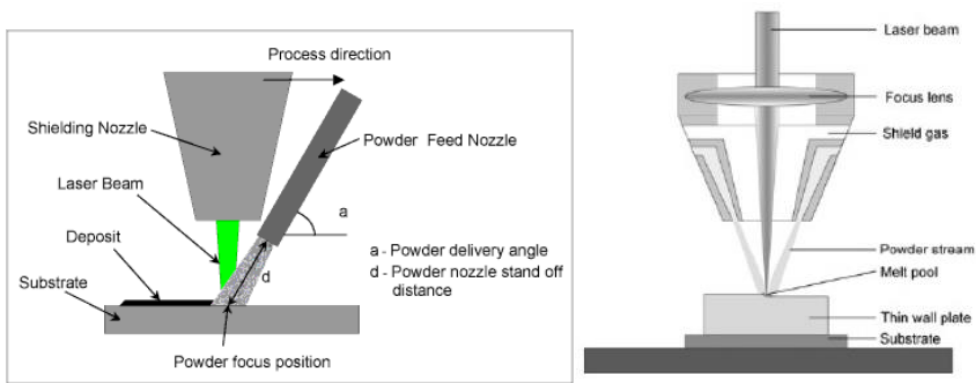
Nozzle Arrangements: Side Feed (left) and coaxial nozzle (right).
